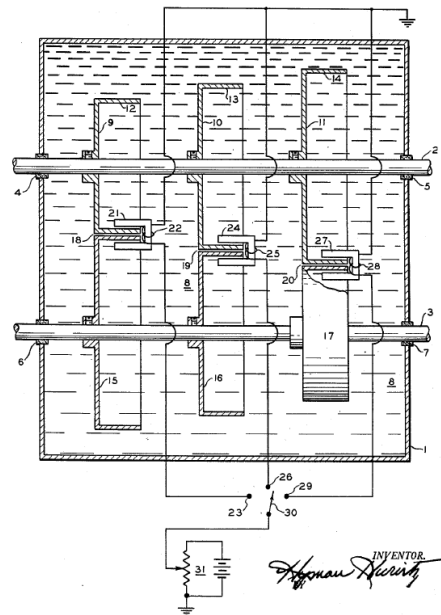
Electromagnetic Spur-Type Gearbox (5)
